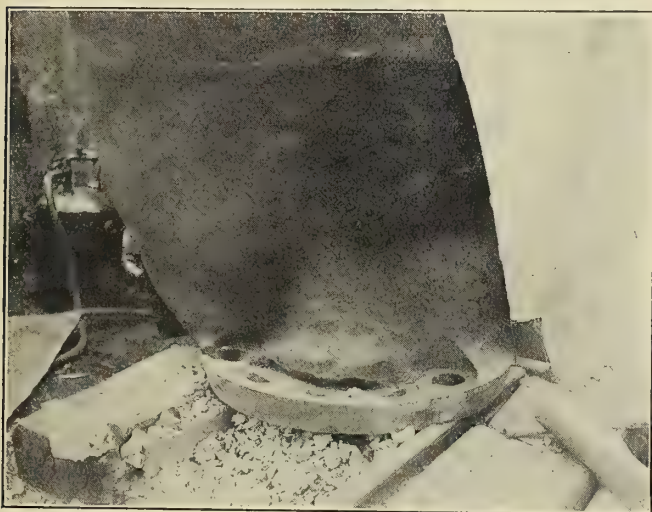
FRACTURED BLADE PREPARED FOR WELDING
